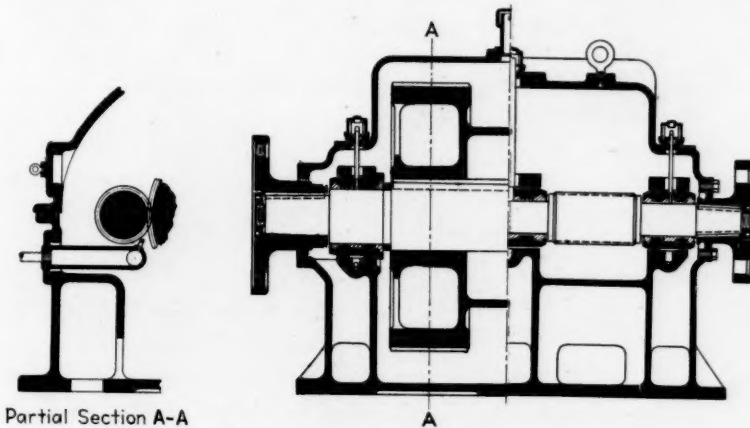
DOUBLE HELICAL SPEED REDUCING GEAR
